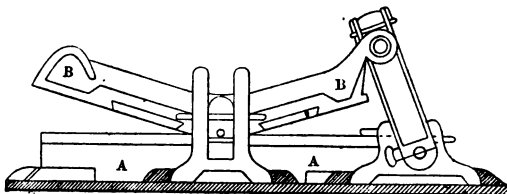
Double Crocodile-squeezer. *A*, Lower jaw. *B*, Upper jaw.
